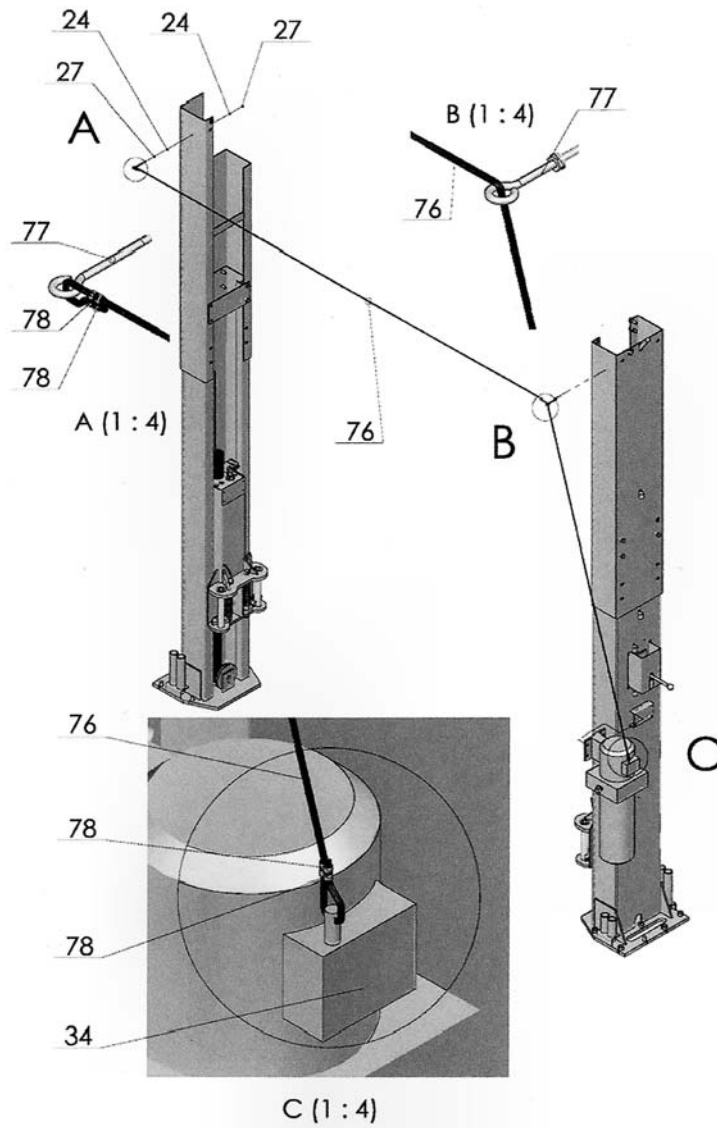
Illustrated Parts Breakdown – Sheet 6 of 6
